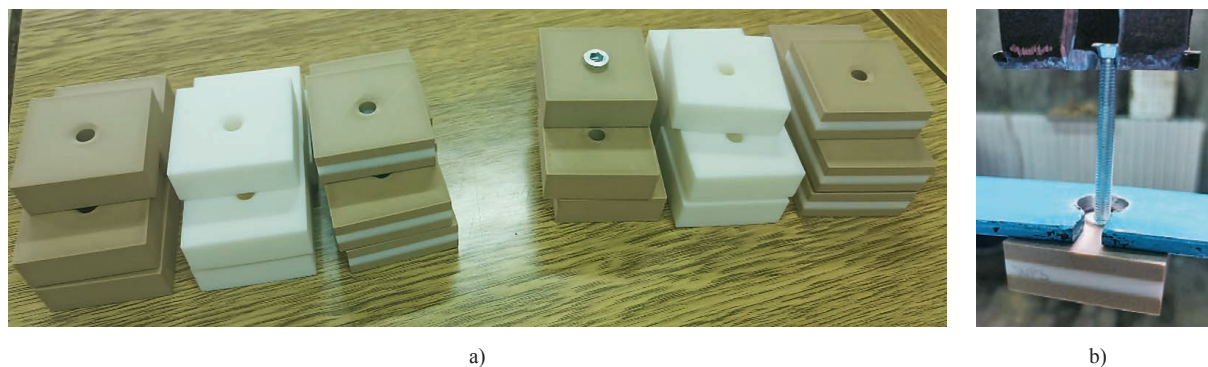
Withdrawal capacity testing: a) 3D printed specimens, b) testing device
